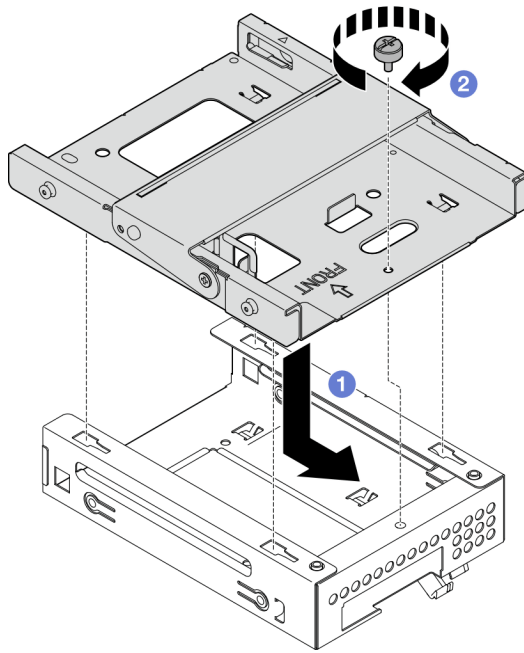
Installing the optical drive cage to the bay 2 drive cage
